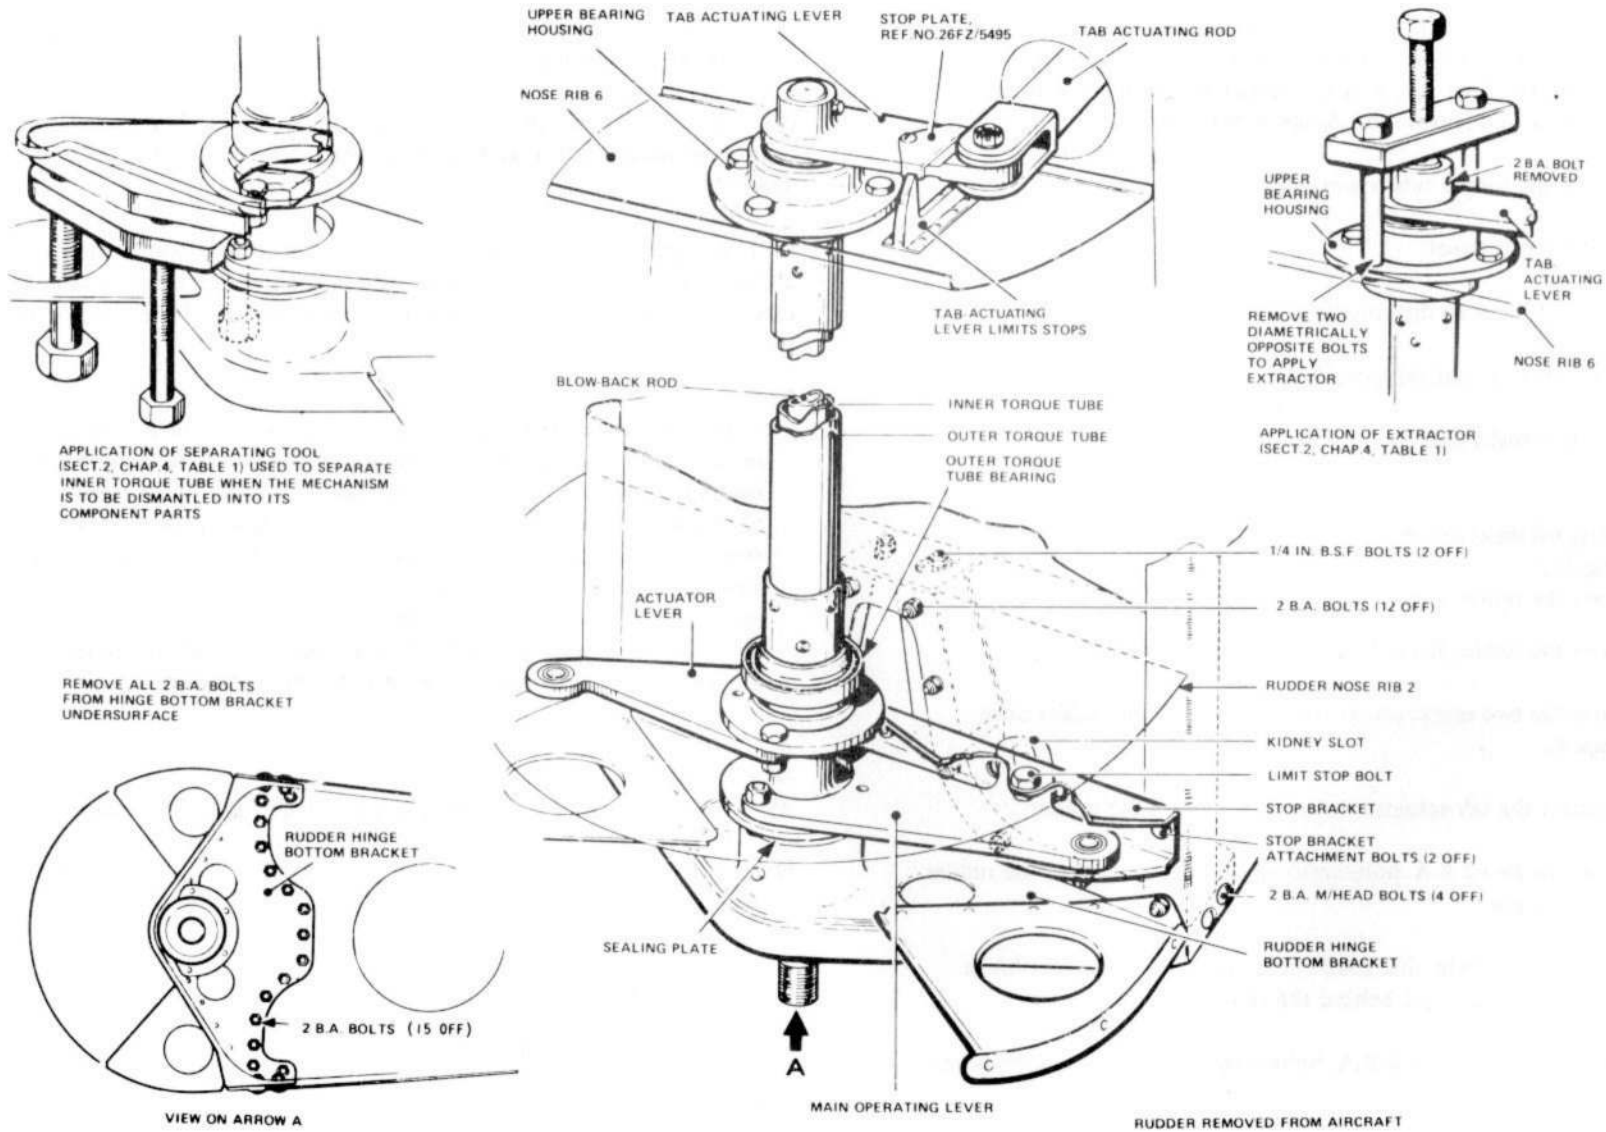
RUDDER SPRING TAB MECHANISM REMOVAL
